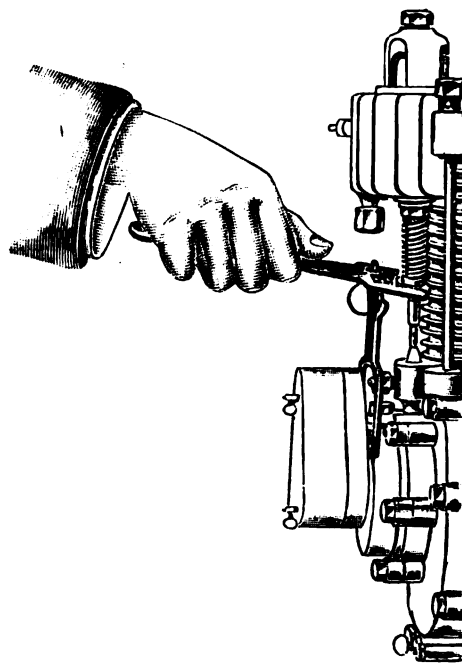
The "Duco" Exhaust Valve Spring Remover.
